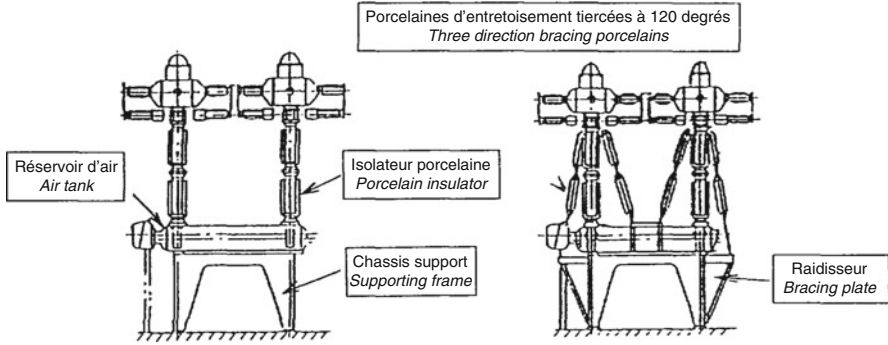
Example of adaption with bracing porcelains and bracing plates
